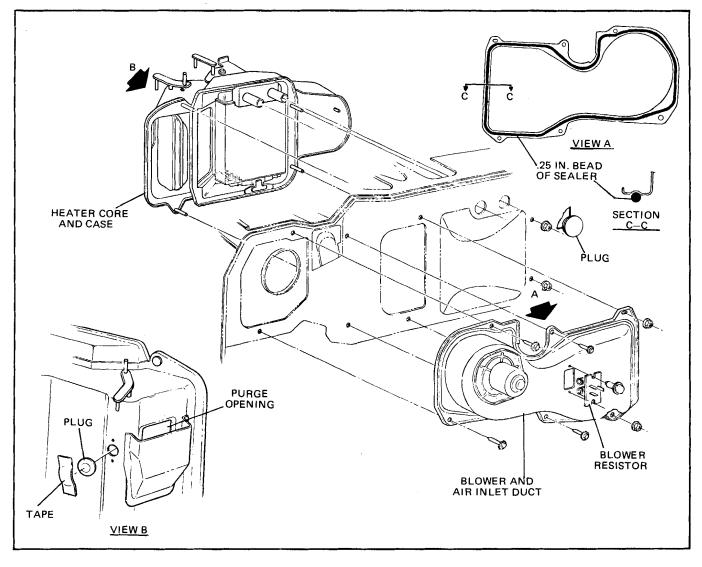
B Series Blower Motor and Air Inlet Duct Installation
